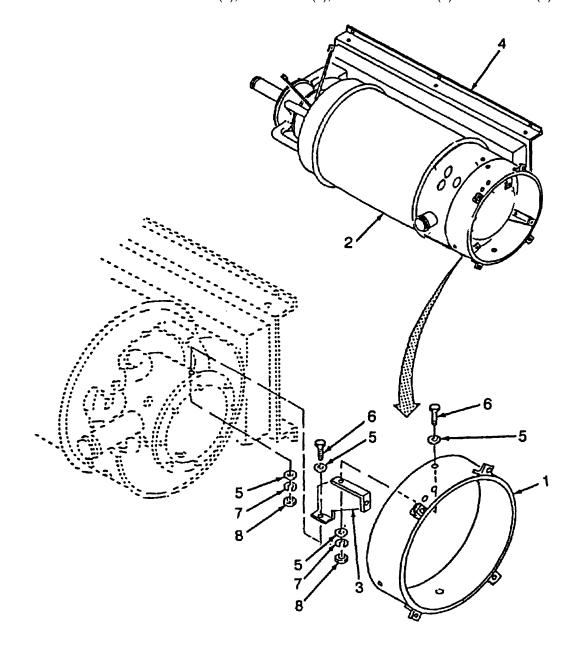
Heat Exchanger, (Model H120) Assembly
